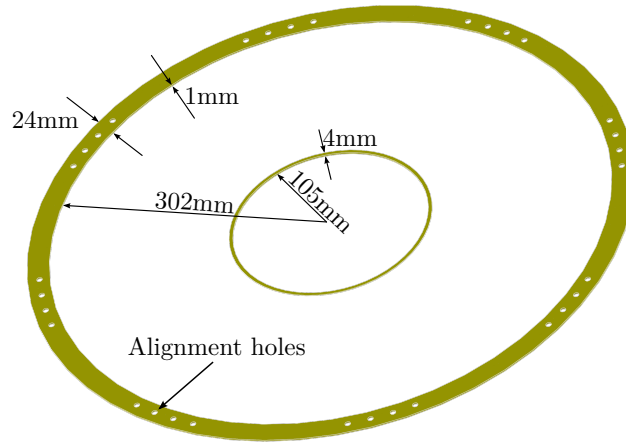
The inner and outer frame for the GEM foils with their dimensions and the alignment holes for installation inside the GEM flange.
